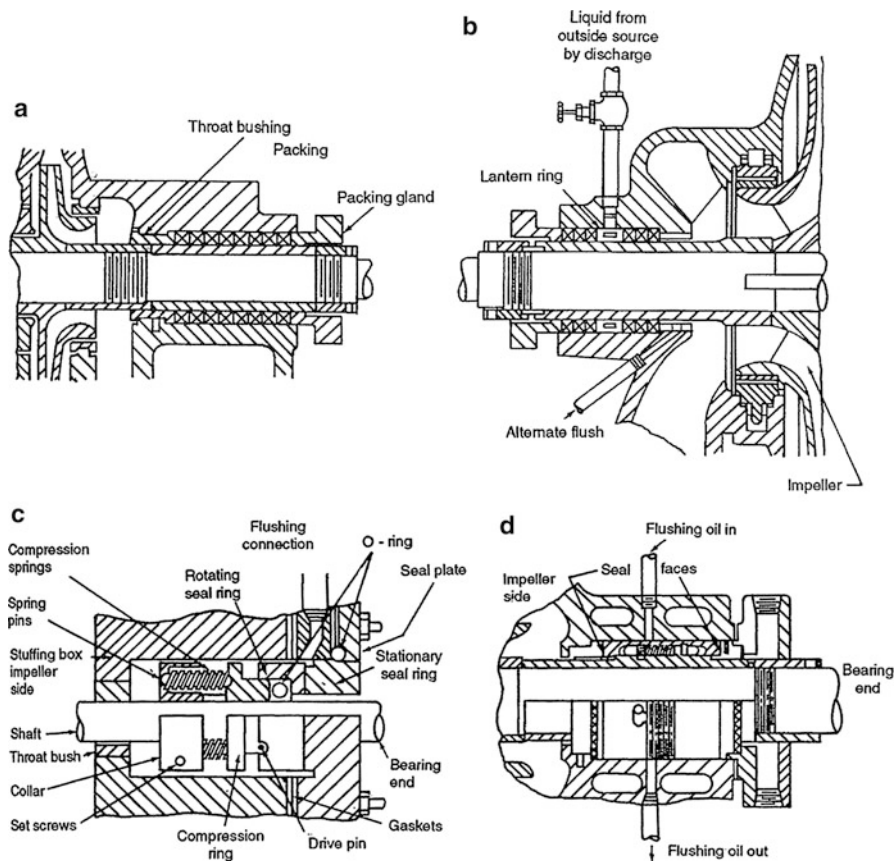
Pump shaft packing and seals. (a) Stuffing box completely filled with packing no lantern ring. (b) Externally sealed stuffing box. (c) Single mechanical seal. (d) Double mechanical seal
